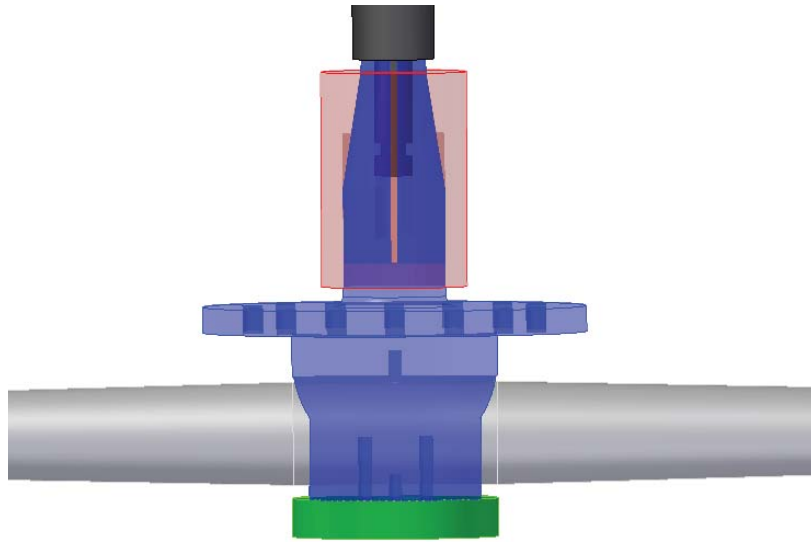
A CAD image of the redesigned spindle. The shaft of the feedthrough is shown in black. The spindle is blue, with the clamp that tightens the collet of the spindle onto the feedthrough shaft shown in red. The rotor is silver, and the clamp that holds the rotor in the V-groove of the spindle is green.
